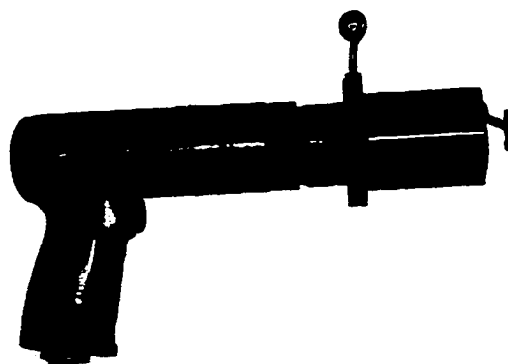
Atlas Copco RRH 10P Rivet Hammer
